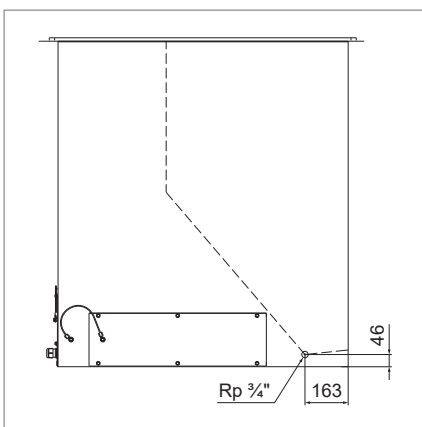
Dimensional drawing for oil/condensate drain (in mm) for oil-proof design and corrosion-protected design for high extract air humidity
